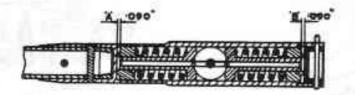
SECTION - BALL JOINT AT REAR END OF SIDE STEERING TUBE.
